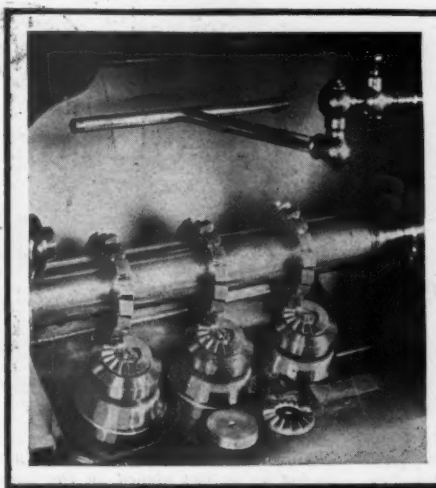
Making the teeth on the rotors for Klaxonets. Five minutes are required to completely mill three rotors as here illustrated. Blank and completed wheel in the foreground
